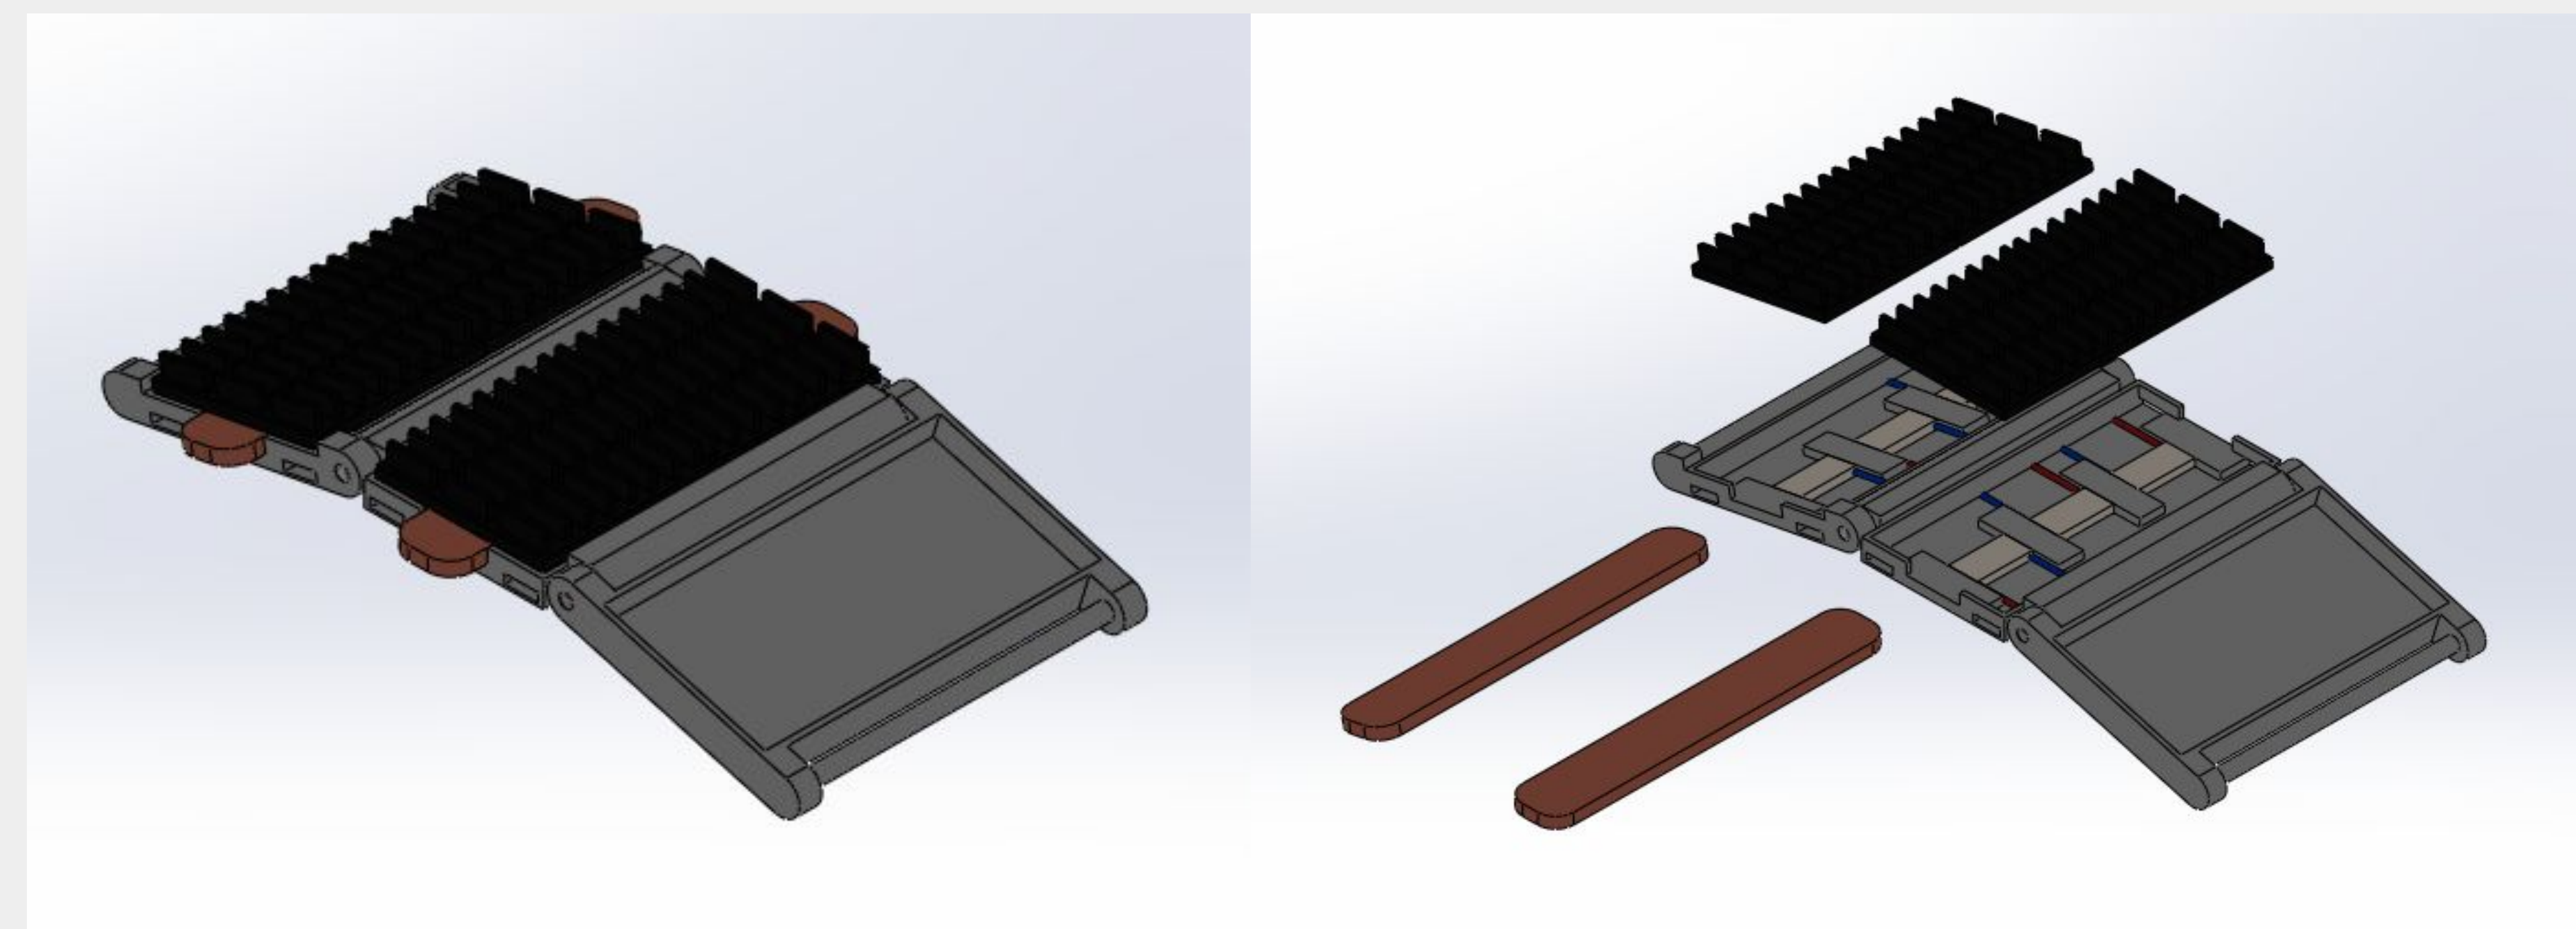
An assembly (left) and explosion (right) of the TEG integrated wearable device.
